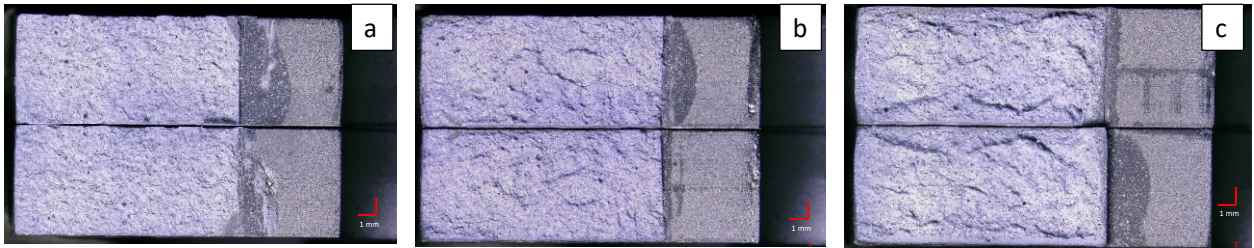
Typical fracture surface of RDCB specimens for 0.18 mm (a), 0.3 mm (b) and 0.64 mm (c) bond line thickness
